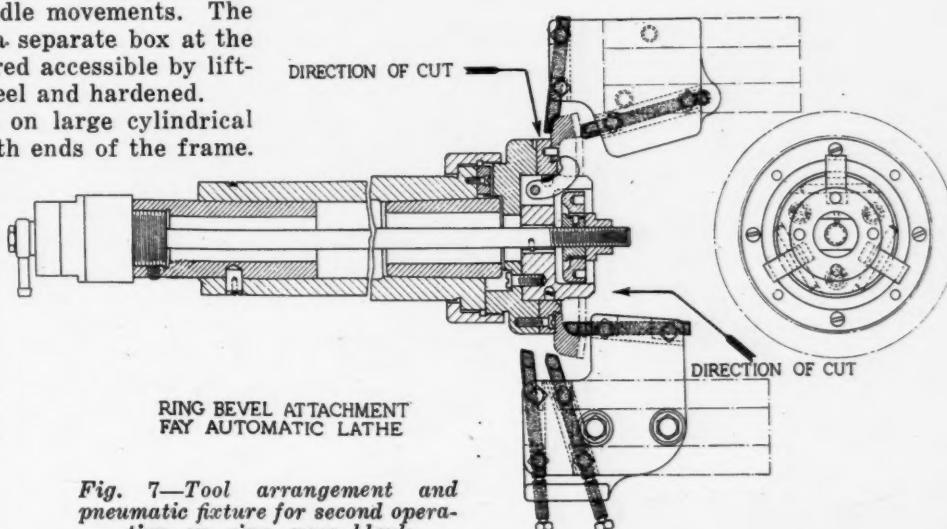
Tool arrangement and pneumatic fixture for second operation on ring gear blank
